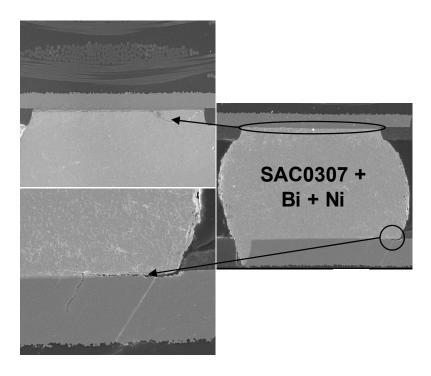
7: Failure Modes observed in SACX-Plus Solder Joints
